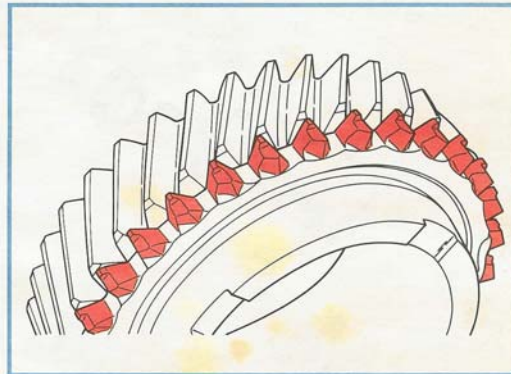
, Speed Gear Clutch Tooth Back-Taper.
